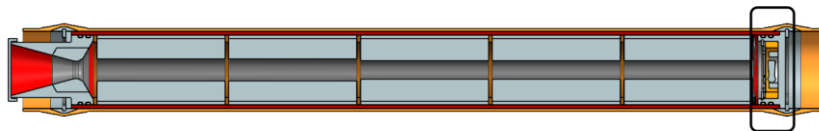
Cross-sectional view of A2 motor CAD model, with highlighted igniter location
